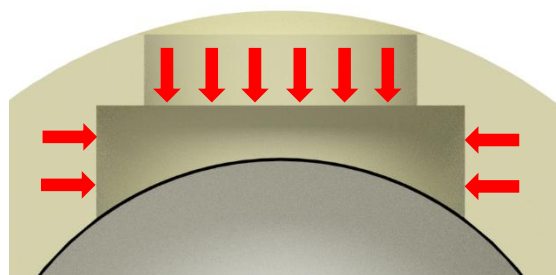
If necessary, a Teflon hammer can be used.
